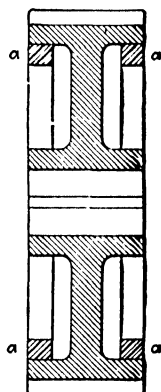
Gear with sound-deadening rings inserted. These should be either shrunk or tack-welded in a few spots so as to allow some relative rubbing during the vibration.
